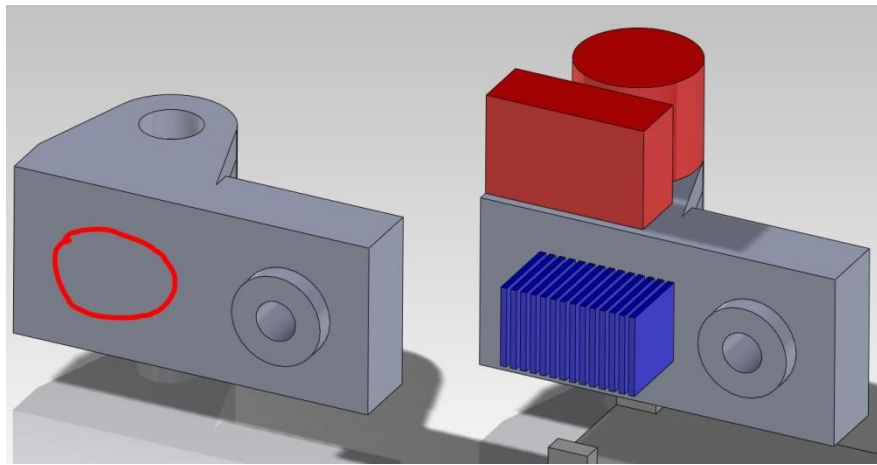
6 the left side shows the casting orientation and the right side shows the casting feeder and cooling fin location
